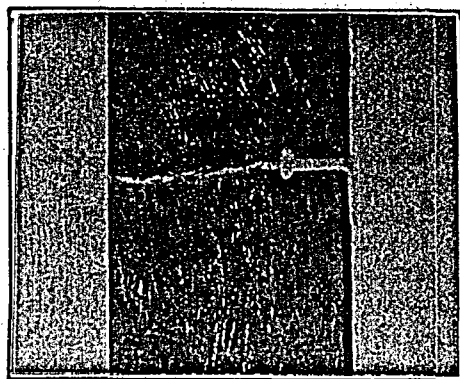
Fractured specimen with notch root radius of 2.5 mm in static test.
